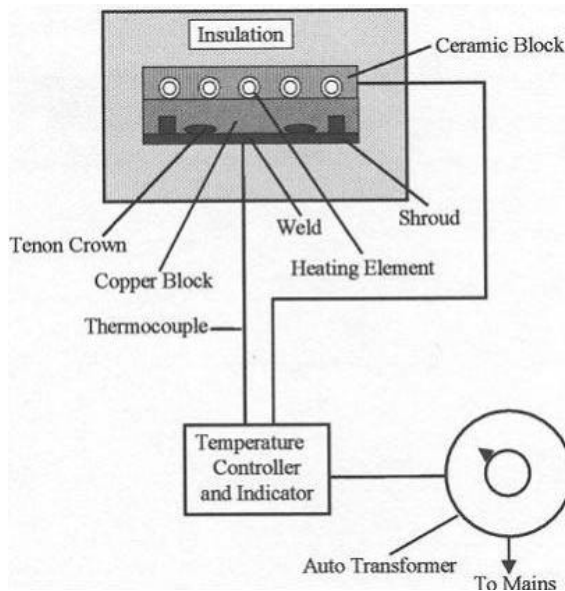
(a): Schematic of the heat treatment set up used for localised in-situ PWHT of a shroud repair weld
